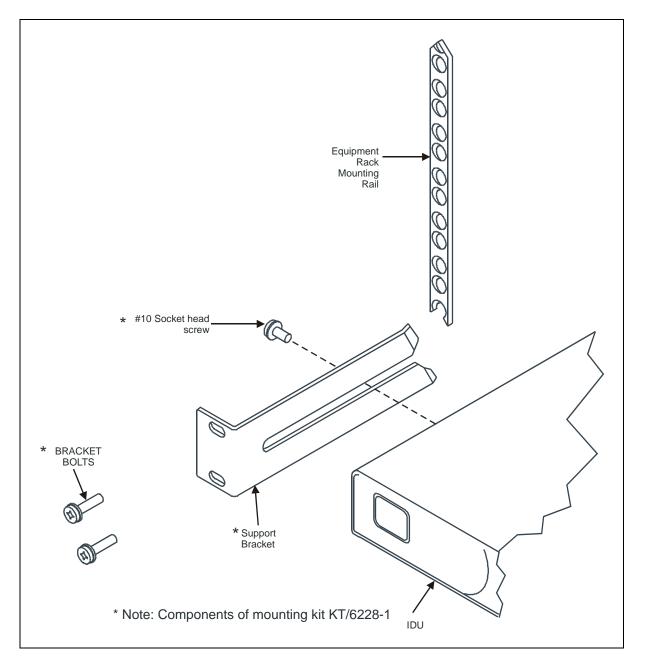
Installation of the Optional Mounting Bracket KT/6228-1
